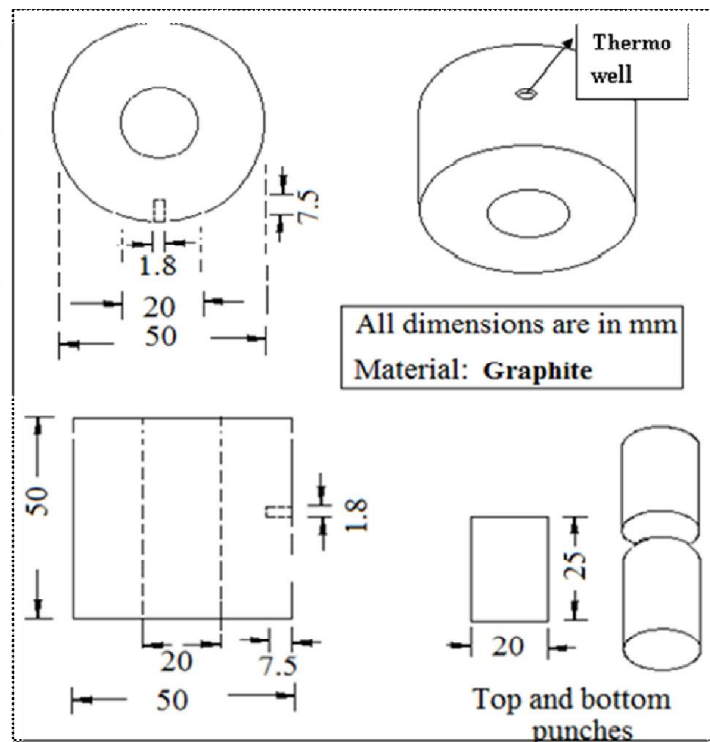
(a) Schematic drawing to the scale and the dimensions of the die, punches, and spacers
